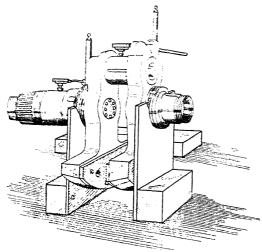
CHECKING FRONT BALL BEARING JOURNAL FOR CONCENTRICITY AND CRANKPIN FOR PARALLELISM AND TWIST USING DIAL INDICATORS.
